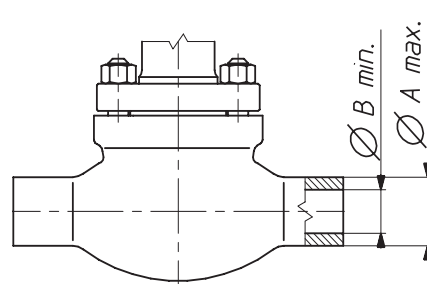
Dimension of butt welding ends executed as cast
